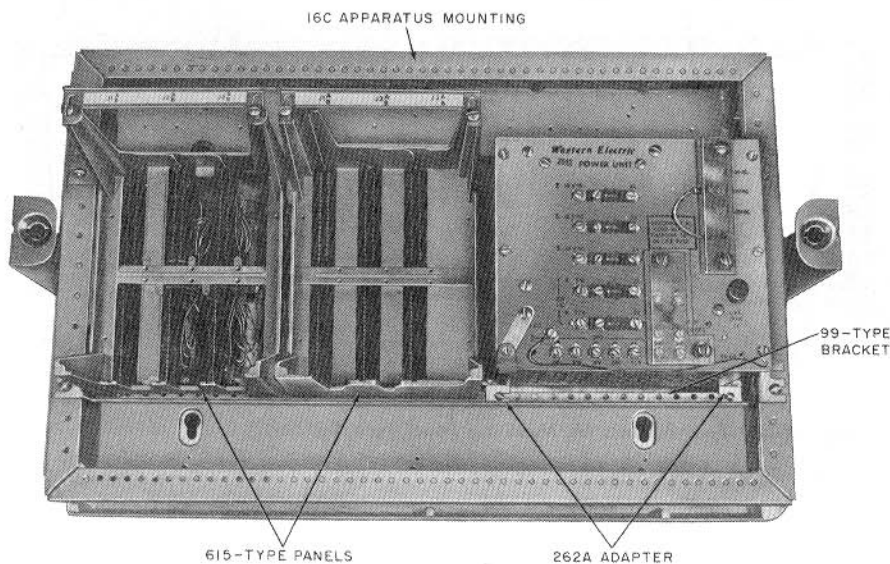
16C Apparatus Mounting With 615A Panels Mounted on 99-Type Brackets and 20-Type Power Unit Mounted on 262A Adapter
